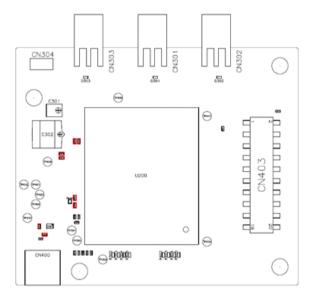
Default Soldering Configuration for Jumpers for the SL80xx Socket Board (Top View)
